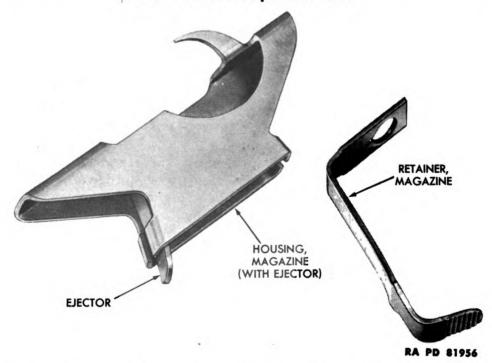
Magazine Housing and Magazine Retainer Group of Stevens Rifle, Cal. .22, Model 416-2 — Exploded View
